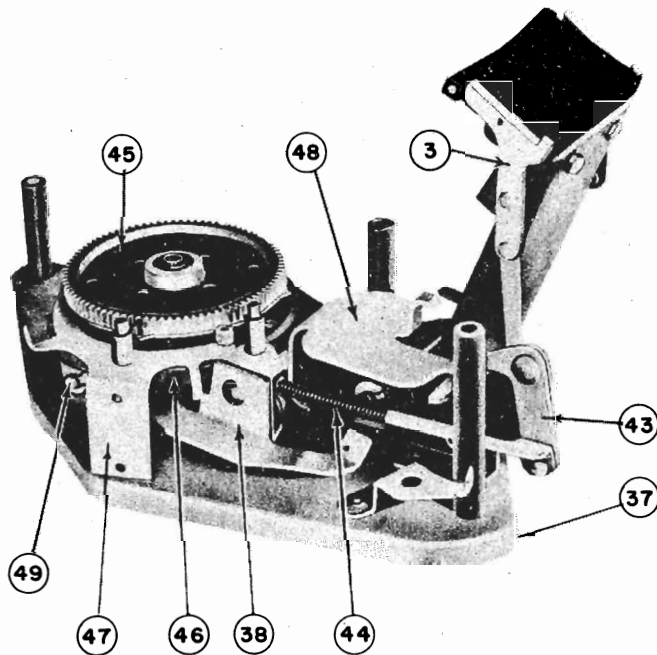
PARTS LOCATION -- SUB PLATE ASSEMBLY
